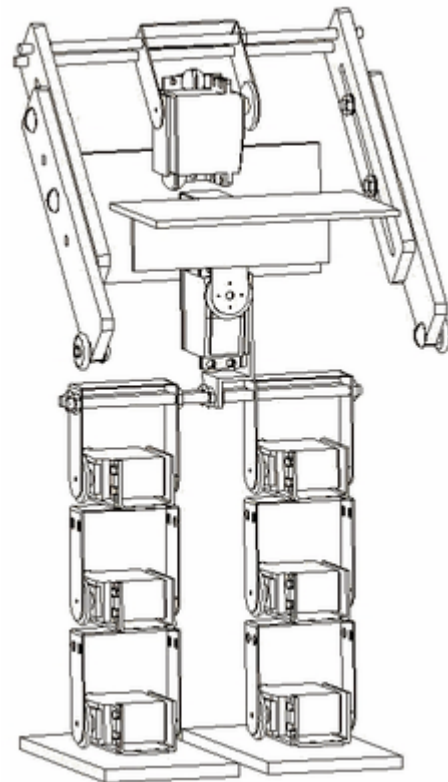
A Pro/E drawing of the final Cerberus design (chest plate in open position; control board not shown)
